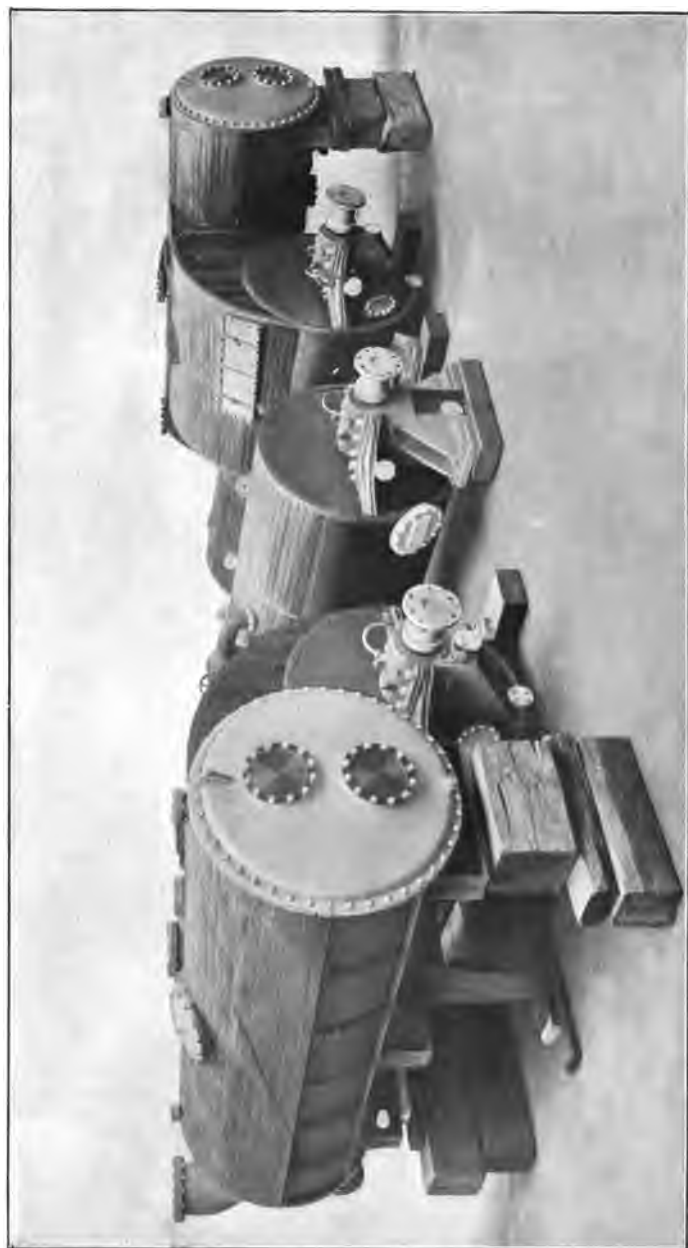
PLATE XXVI.—THE PROPELLING ENGINES OF THE STEAM YACHT "EMERALD."
